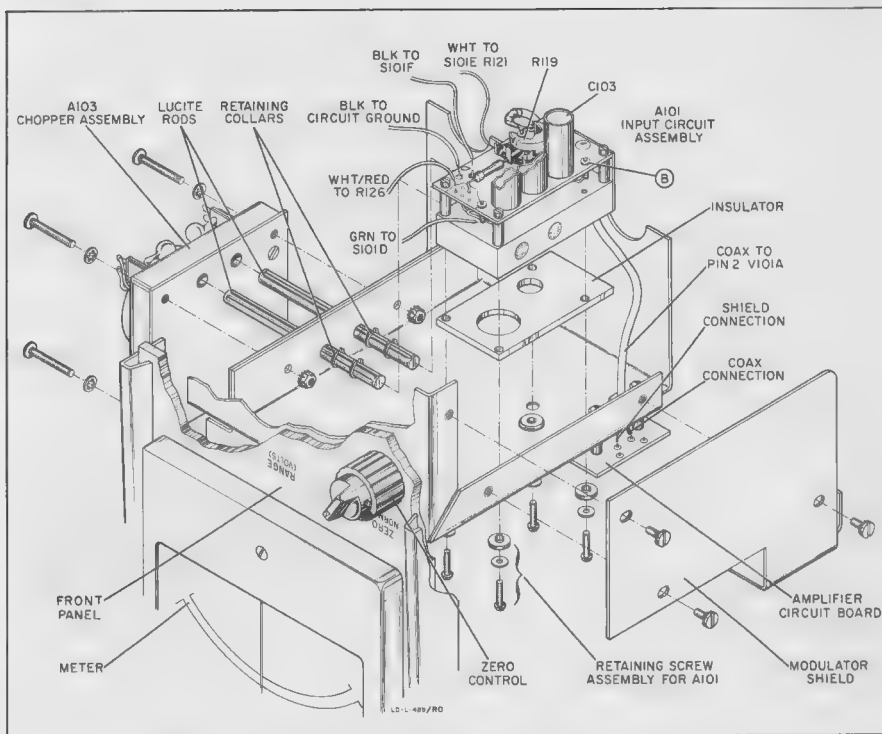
Exploded View, Showing Disassembly for Modulator Replacement
